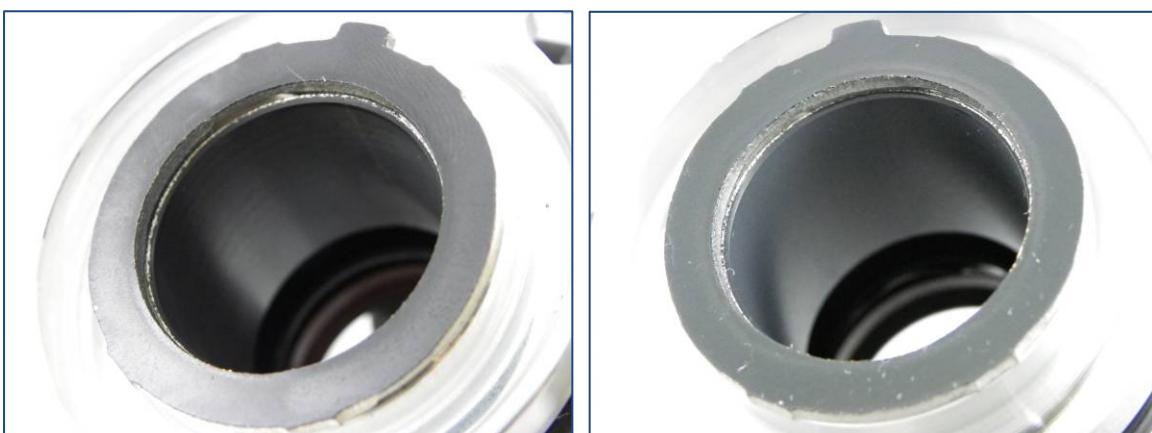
AF-8029 JP-8 (HT Left), Front Pump Body Camshaft Bushing, JP-8 (Base Right)
